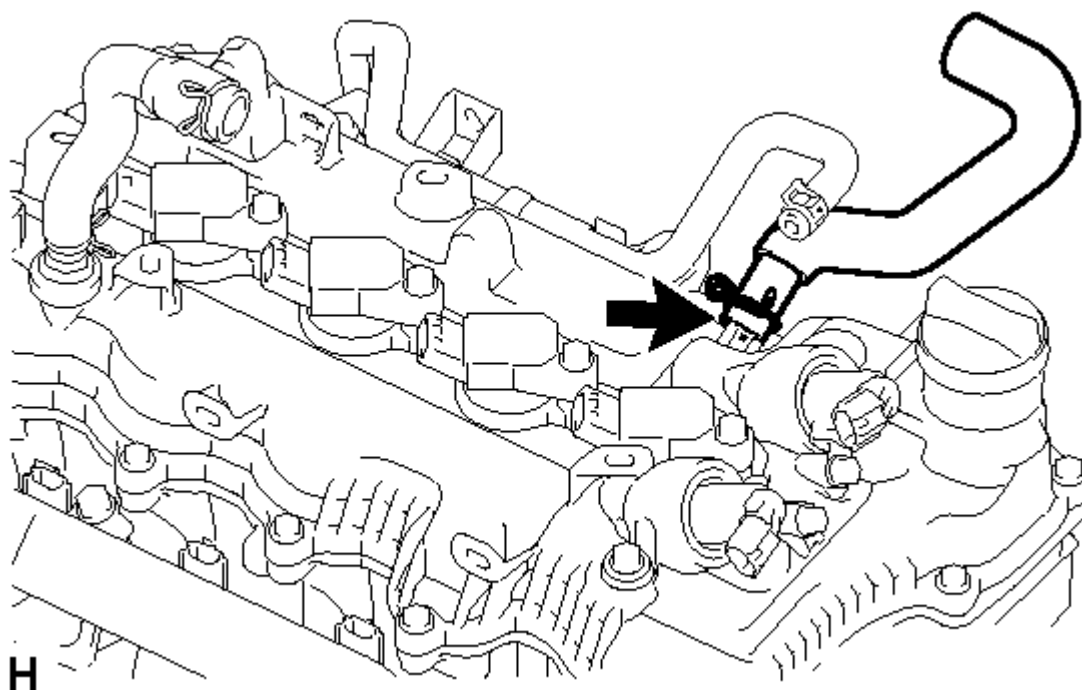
Identifying No. 2 Ventilation Hose Clamp
